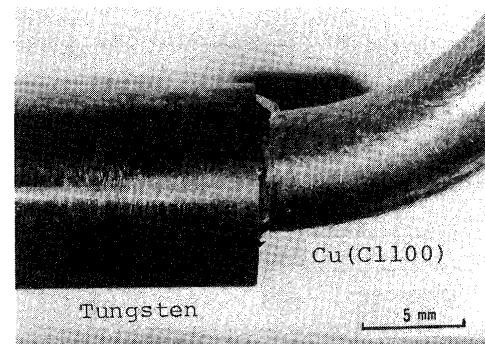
Appearance of bending tested specimen of Cu + W combination
